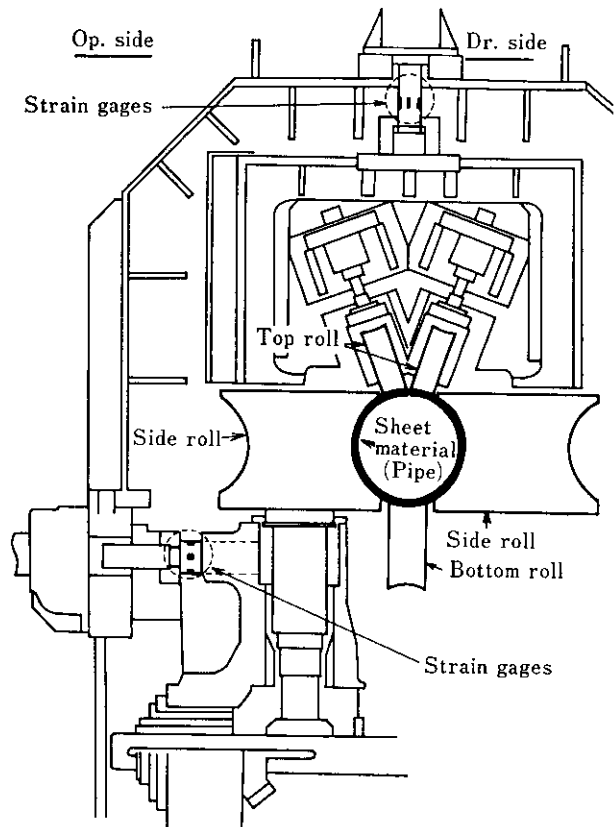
Strain gage positions for measuring forming load in squeeze side and top rolls
